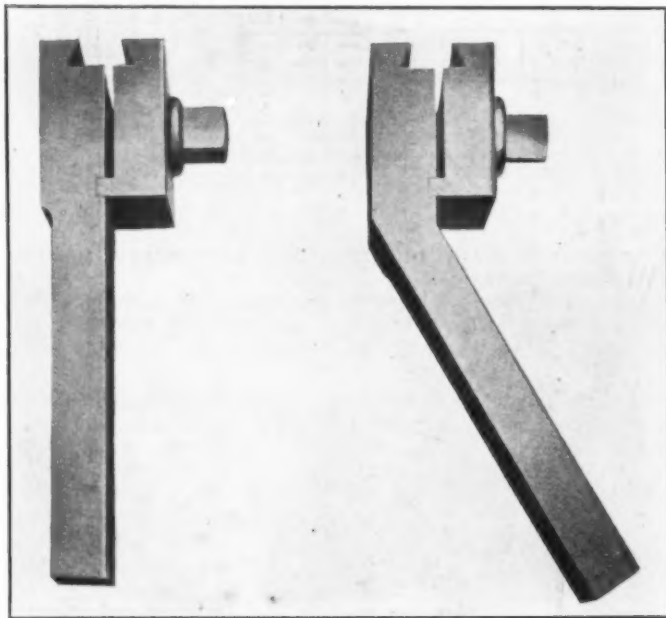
TOOL POST FORMING CUTTER HOLDER.
